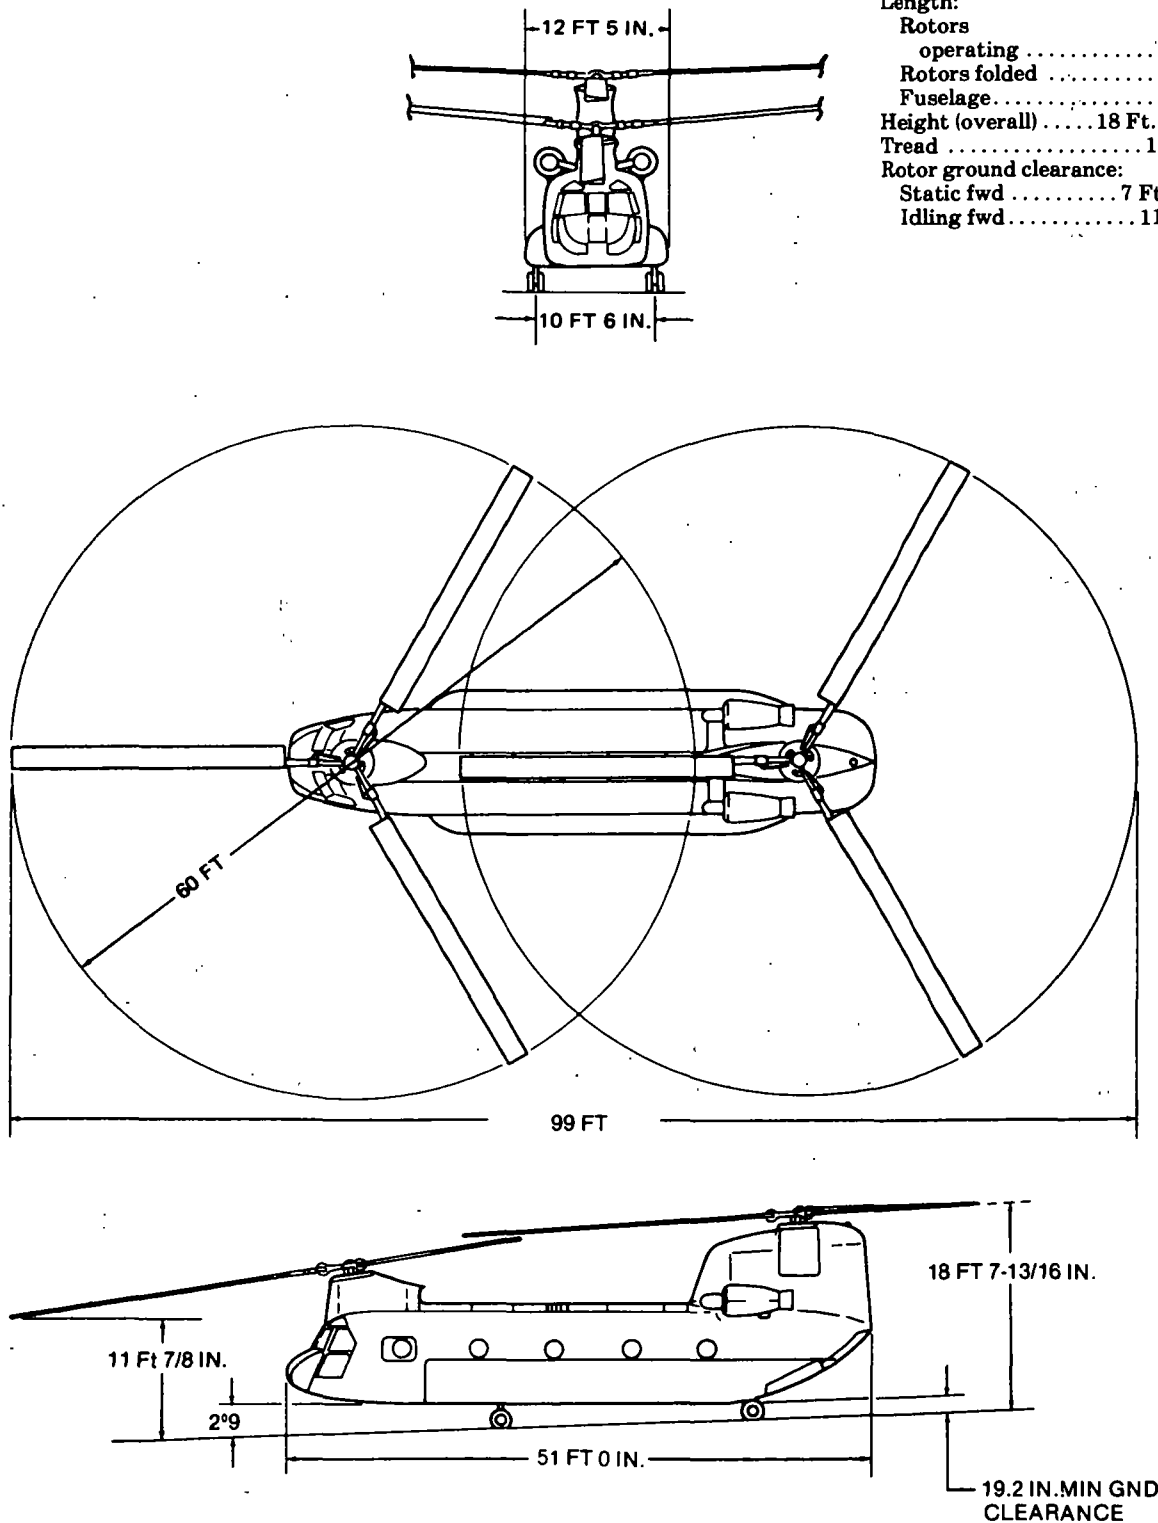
Principal Dimensions, YCH-47D (Chinook)
